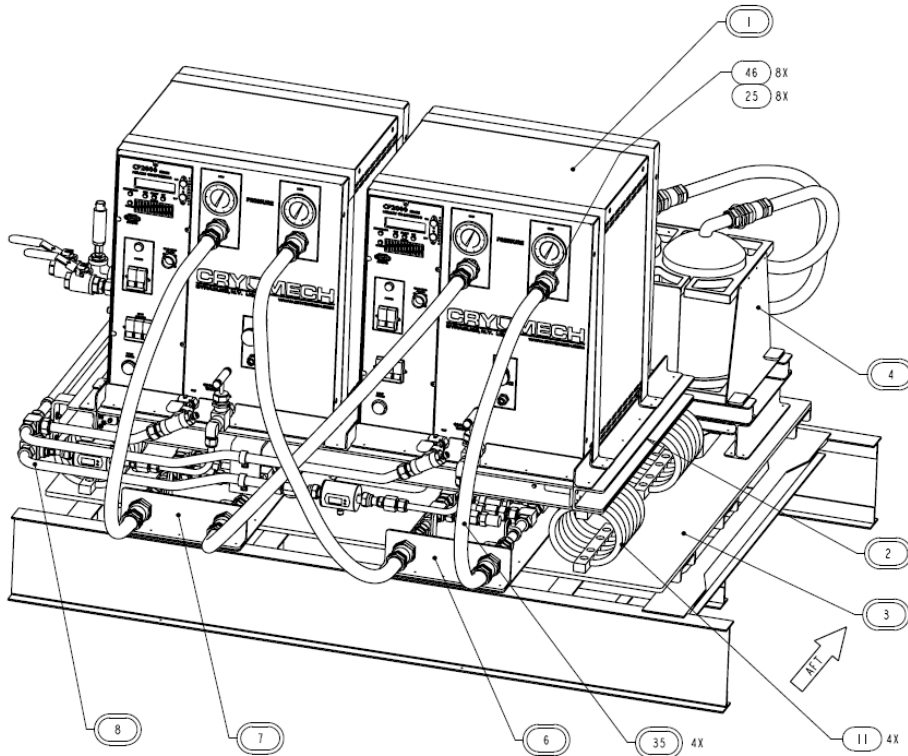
Cryocooler Compressor Package Location, isometric view
